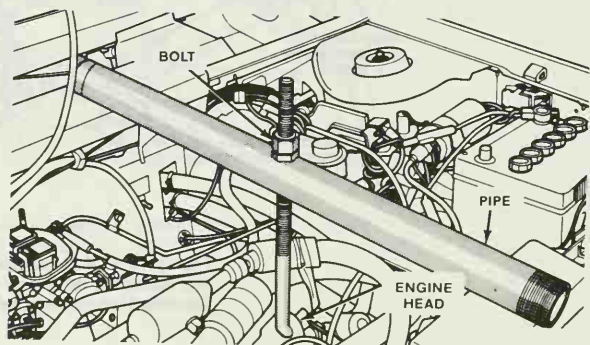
An engine support fixture is used to support the engine when the transaxle is removed. (Chrysler Corporation)
